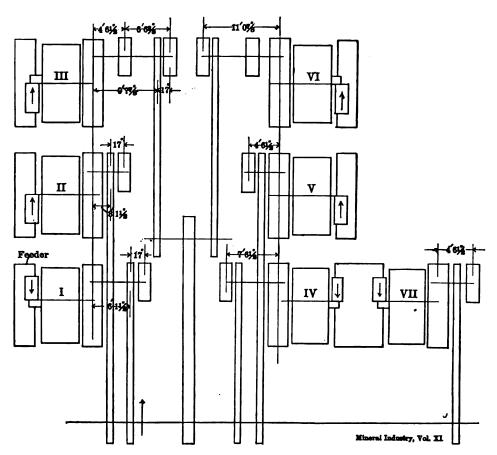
ARRANGEMENT OF MODERN BALL AND PEBBLE MILL.
